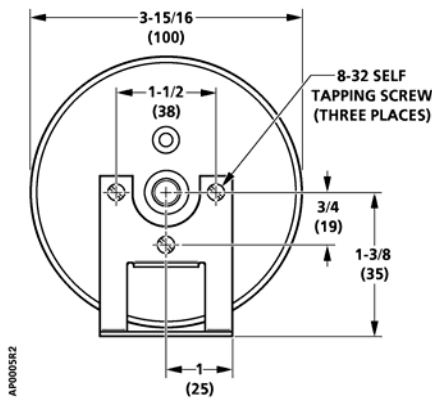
No. 3 Actuator with Pivot Mounting Bracket Dimensions. Dimensions are in Inches (Millimeters).
